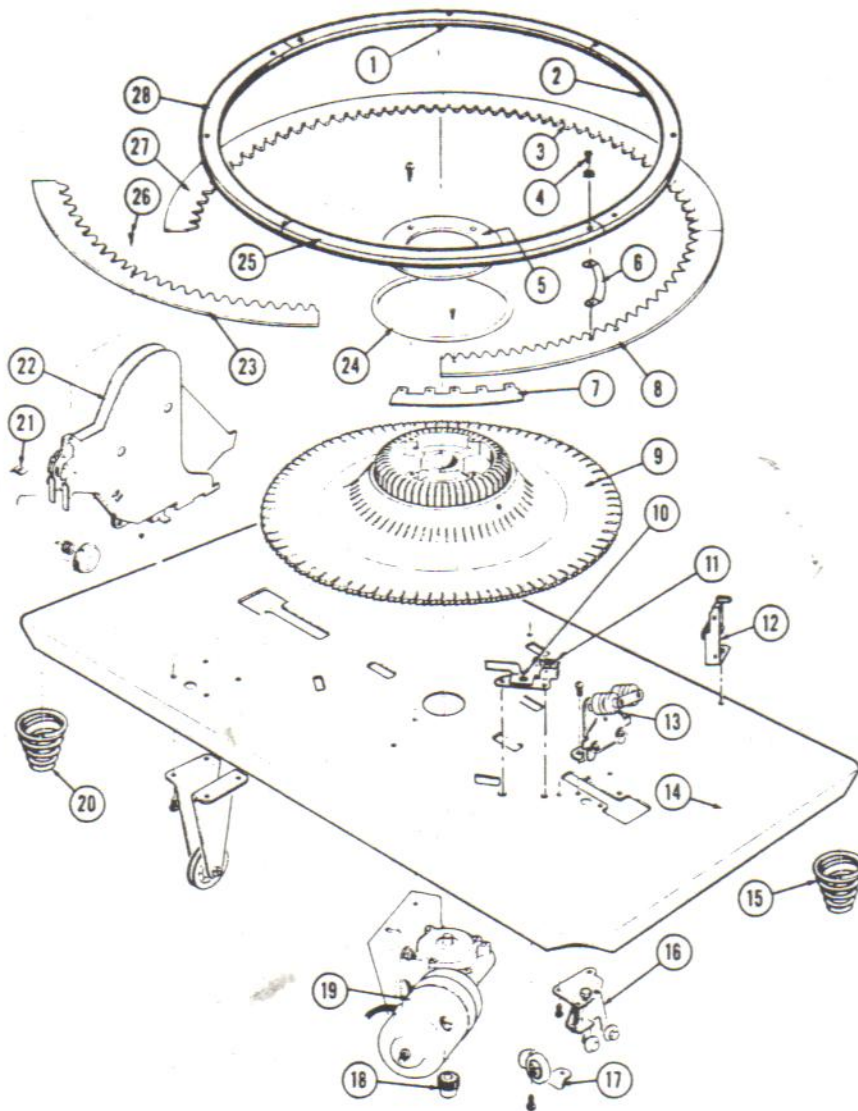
RECORD CARRIER AND CHASSIS MOUNTING PLATE - 2500
